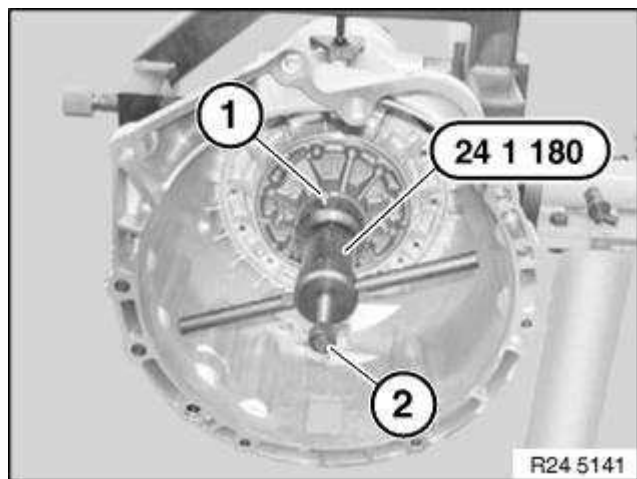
Insert Screw (2) And Release Oil Supply Unit From Transmission Housing
